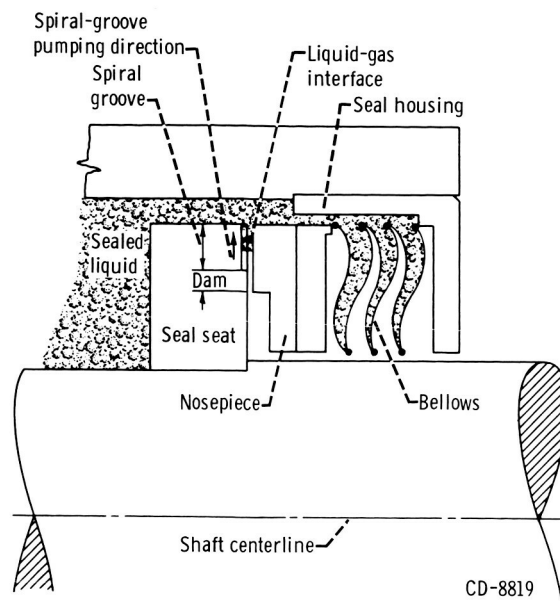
Spiral-groove placement in seal seat for sealing liquid at outside diameter of seal dam.
